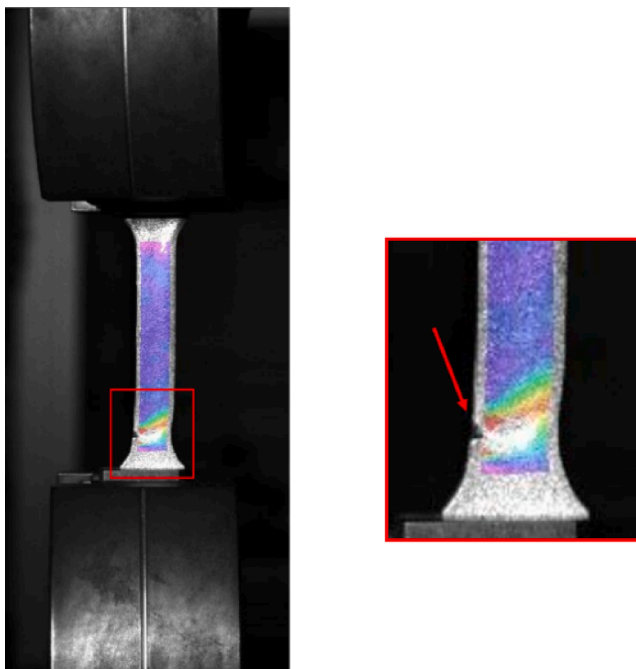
Identification of a surface pore defect that induced premature fracture on 4H middle specimen.
